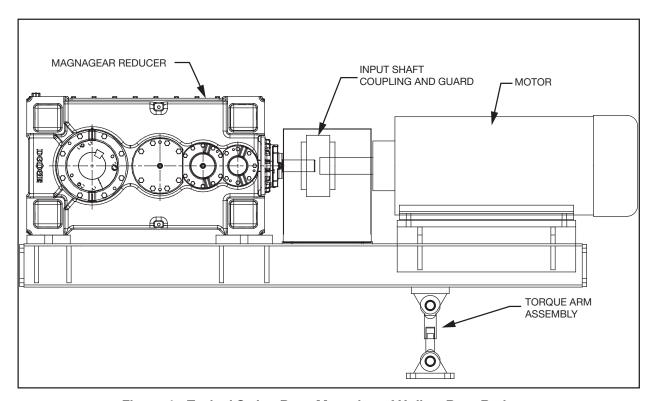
Typical Swing Base Mounting of Hollow Bore Reducer
